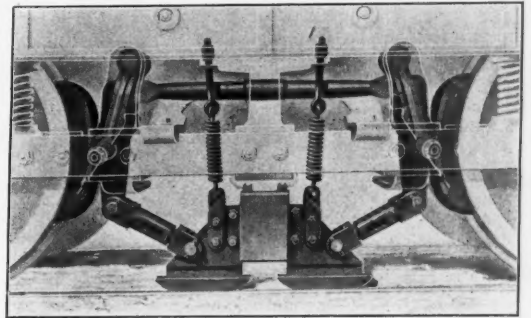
Westinghouse Magnetic Brake—Transparent View Showing Method of Attaching Brake to Car Frame and Trucks.
